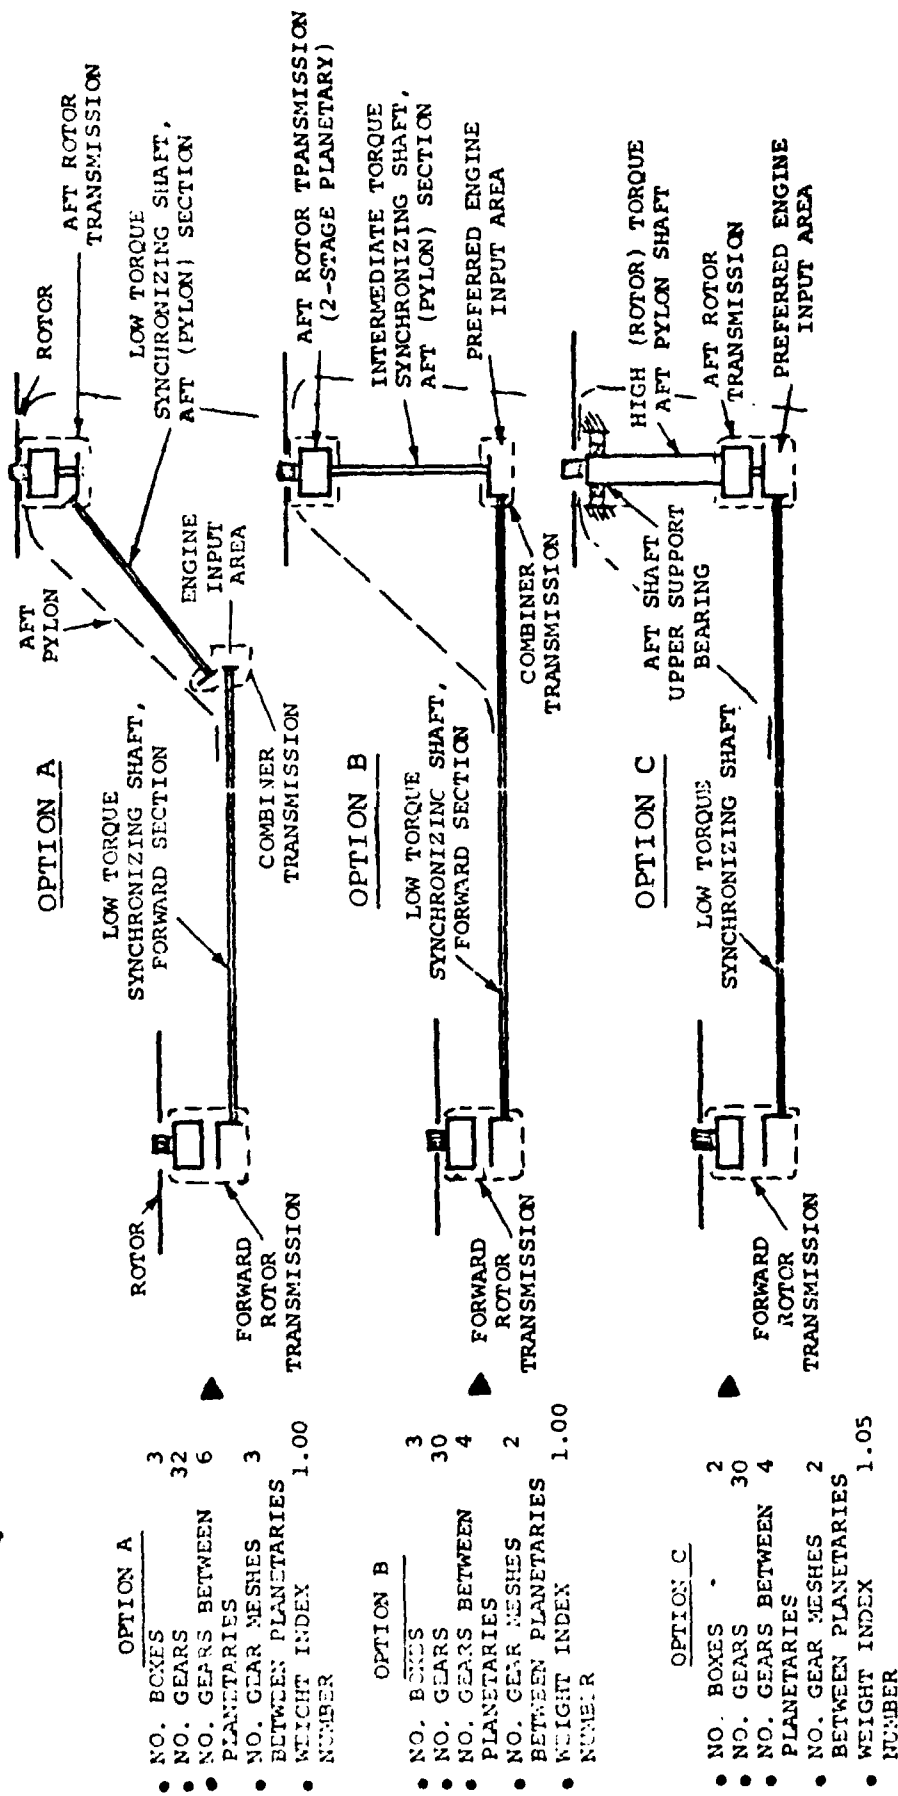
Rotor-to-Rotor Shafting Concepts Definitions
